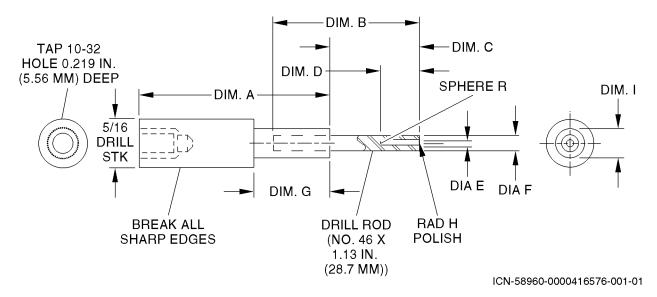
Contact Seating Inspection Kit Contact Adapter, T3009406-3
